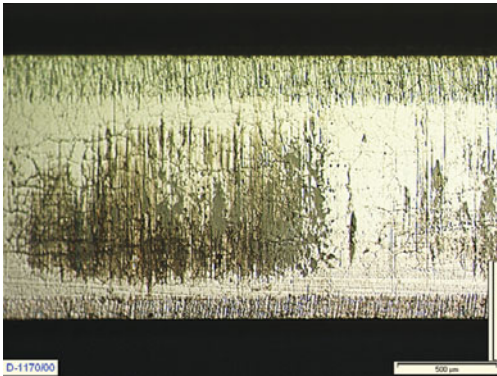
and 7.10: Fretting damage to the bottom side of a 1st piston ring
